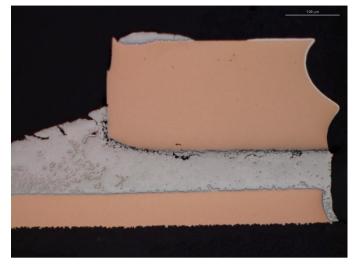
Cross-section of SAC305 soldered QFN component with 12 ppm/°C mold compound and non-wettable flanks
